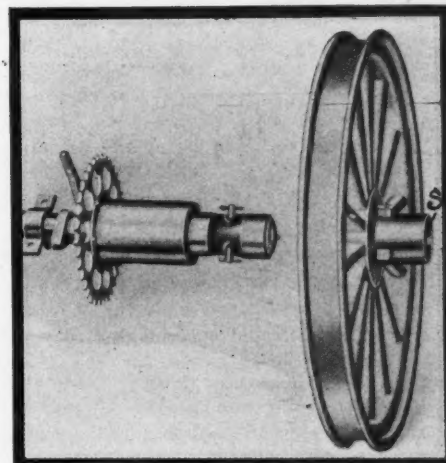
REAR AXLE SHOWING ROAD WHEEL AS ATTACHED FOR NARROW TREAD
